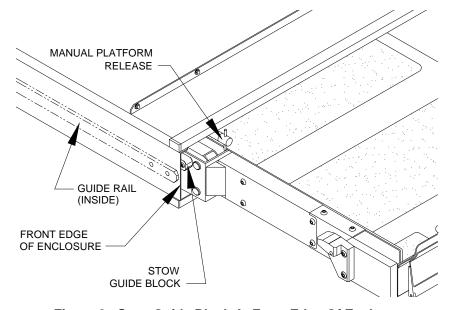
Stow Guide Block At Front Edge Of Enclosure
